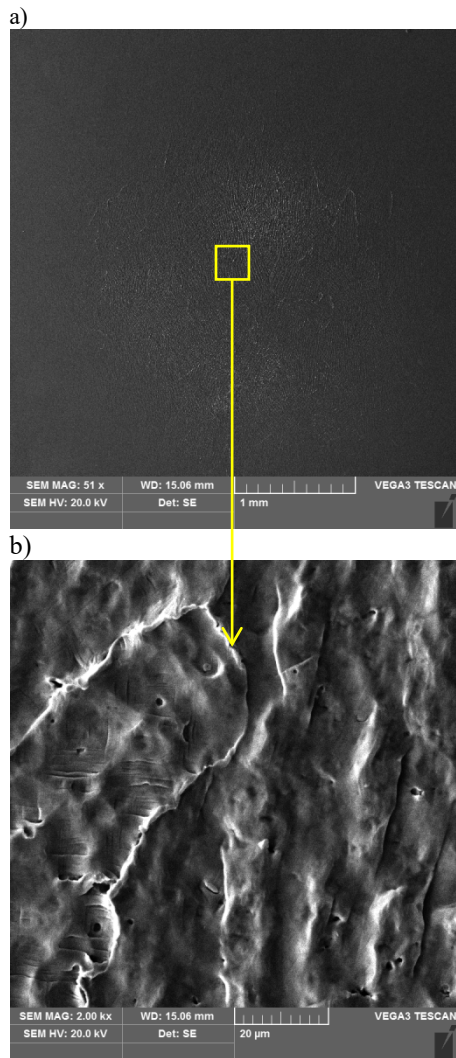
Representative surface view of the AISI 316 weld overlay after cavitation wear resistance testing
